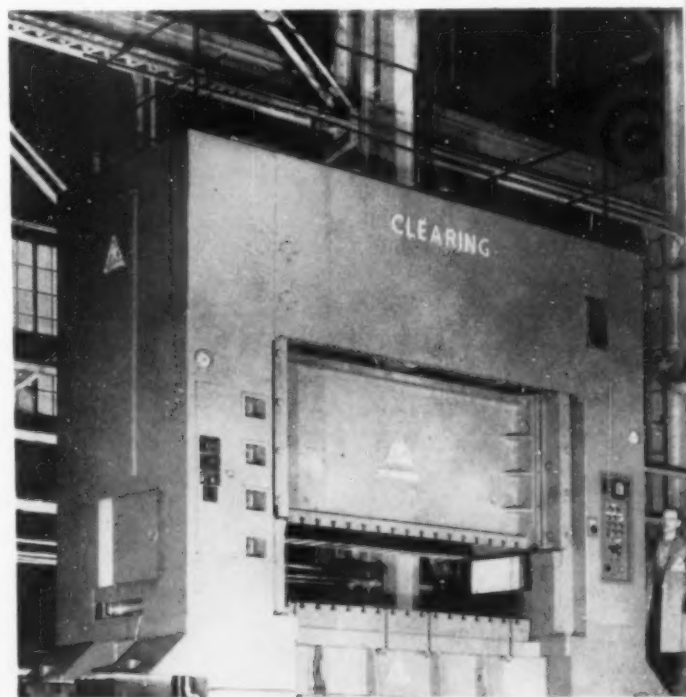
Streamlined underdrive press showing enclosed construction. It has recessed control panel, pneumatic controls, and auxiliary outlets.
